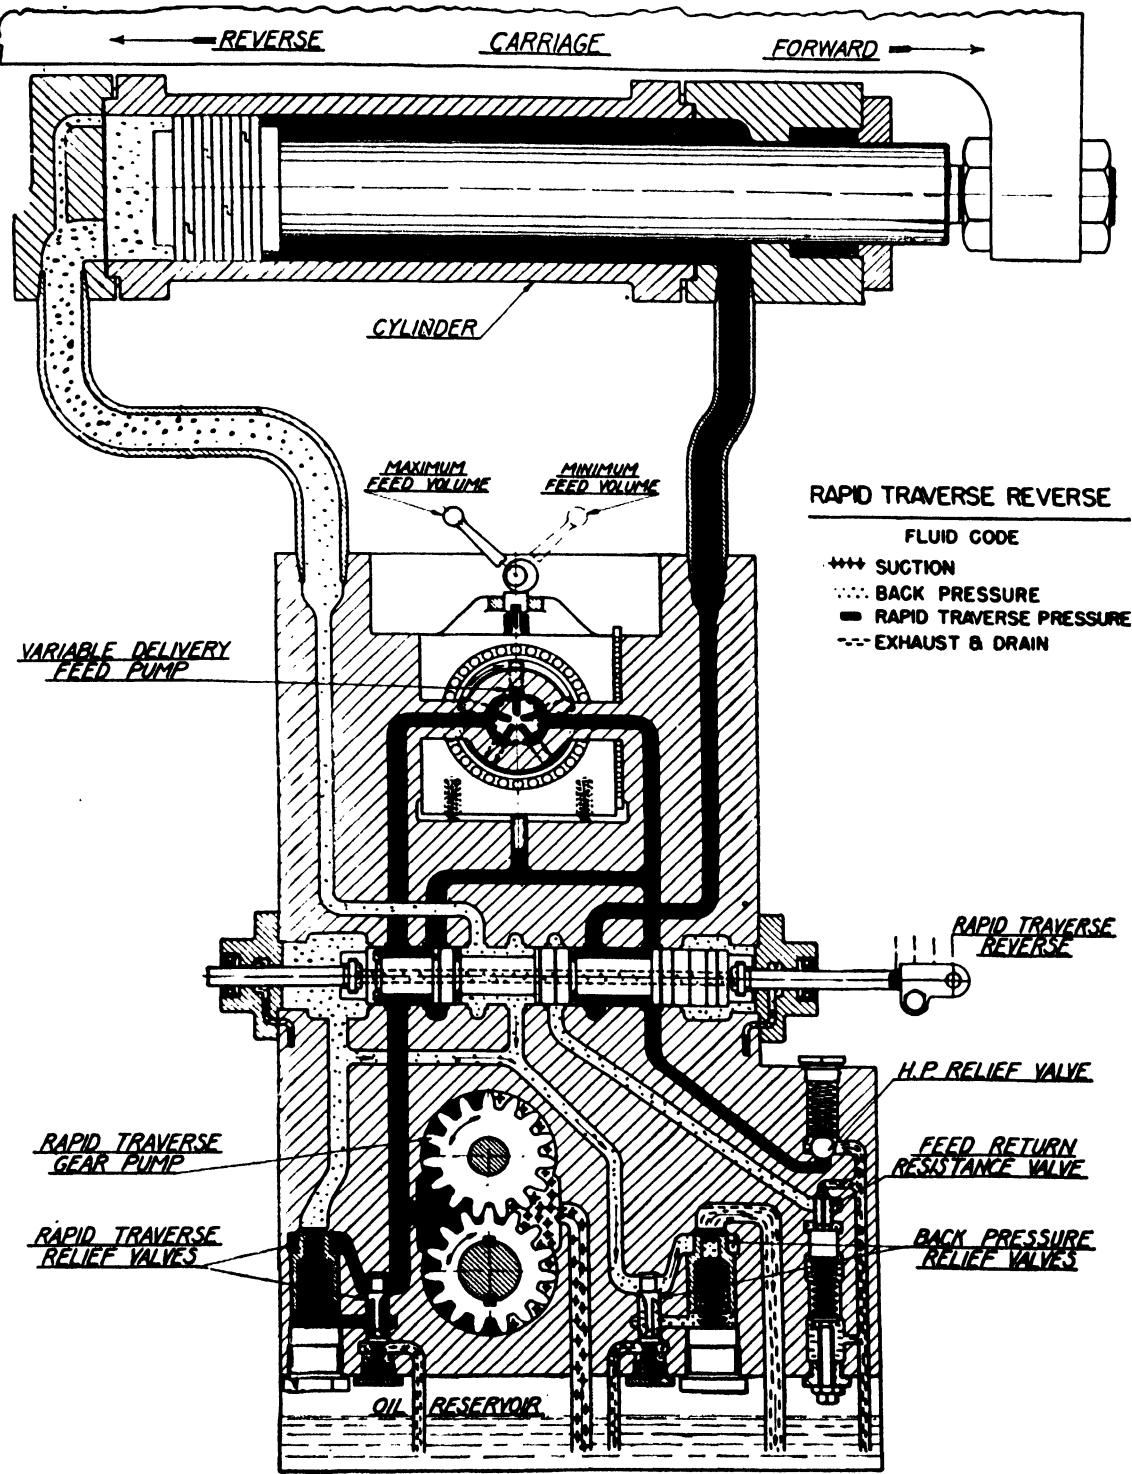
Oilgear fluid power feed, rapid return. (The Oilgear Co., Milwaukee, Wis.)
